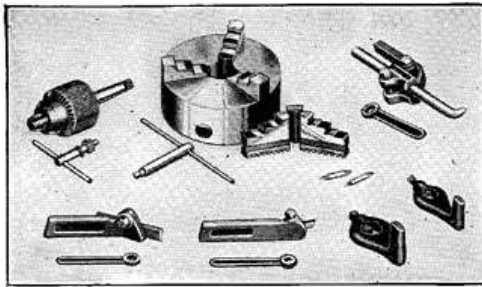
Chuck and Tool Assortment for Making Bushings.
